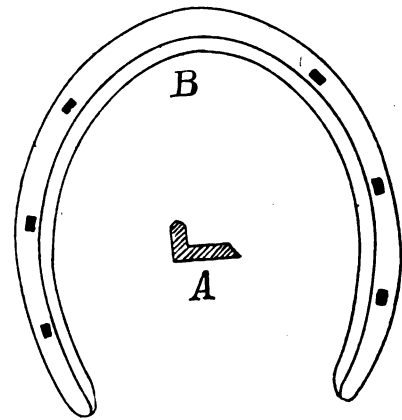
A, SECTION OF RIMMED STEEL SHOE B.
